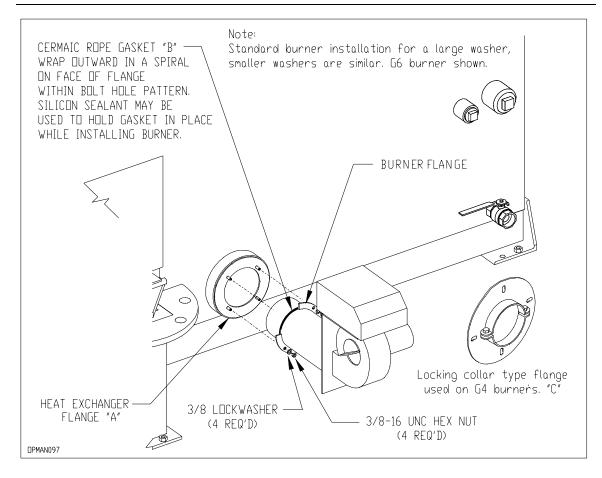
4: Mounting the Combustion Burner (Up to 400,000 and 800,000 BTU)
